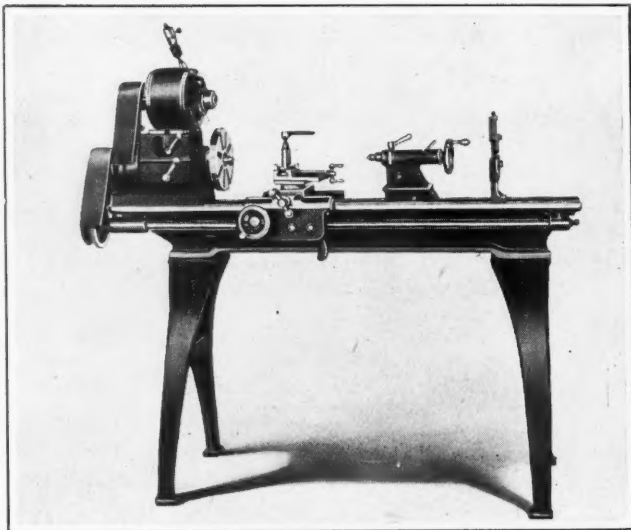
Lathe built by the Shepard Lathe Co. for Garages, Training Schools, Light Manufacturing Work, etc.
